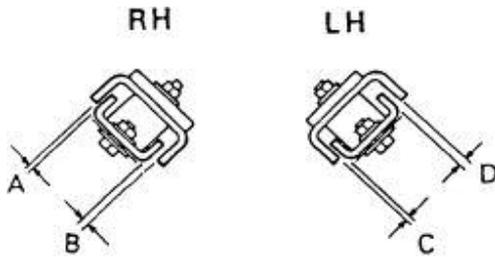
Adjust the No. 1 housing insulator gaps to specification
